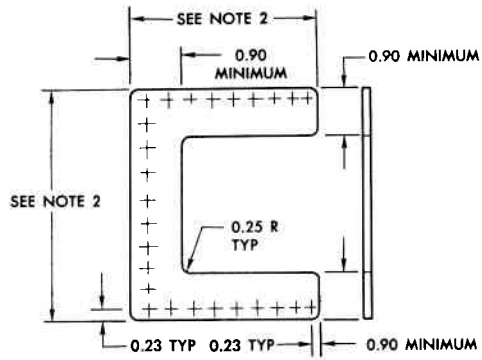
Replacement of Outboard Elevon Actuator Horn (Sheet 2 of 2)
